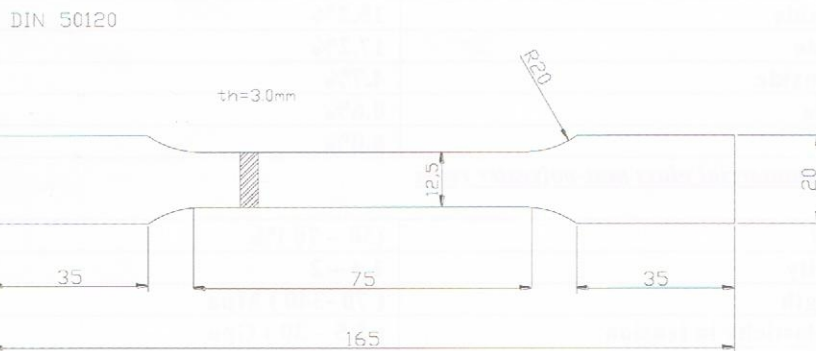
Standard specimen for tensile test (all dimensions in mm).
